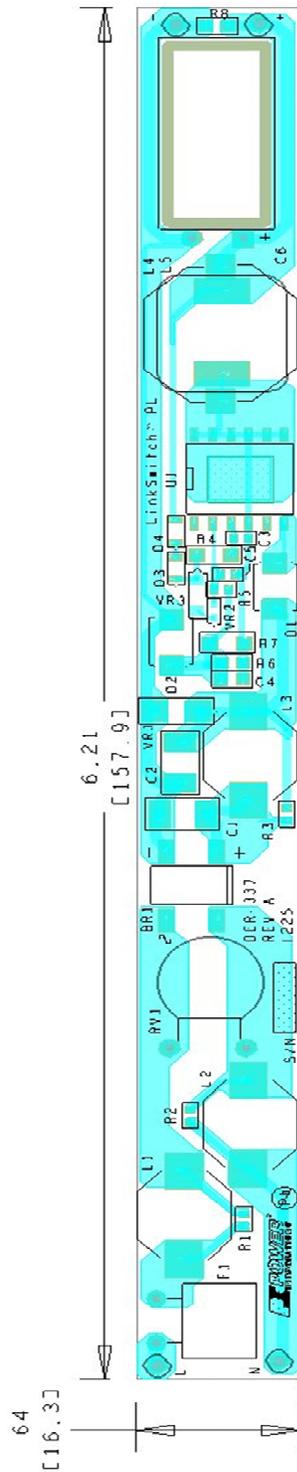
Top Side (PCB Dimension: 158 mm x 16 mm).
